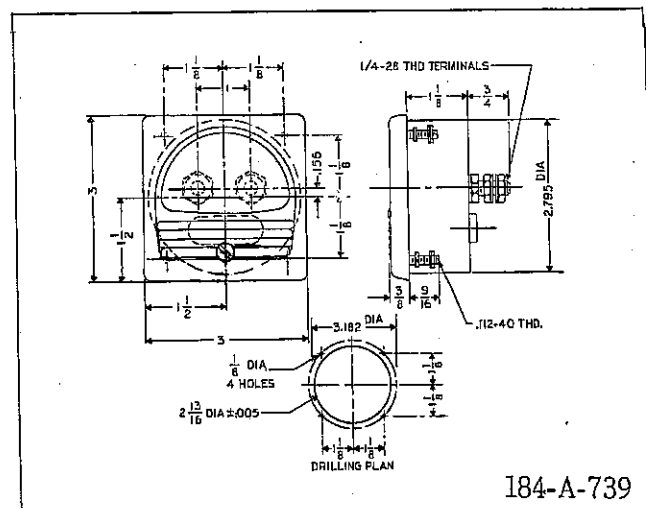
Outline and Drilling Plan of the Projection-Type Test Milliammeter.
